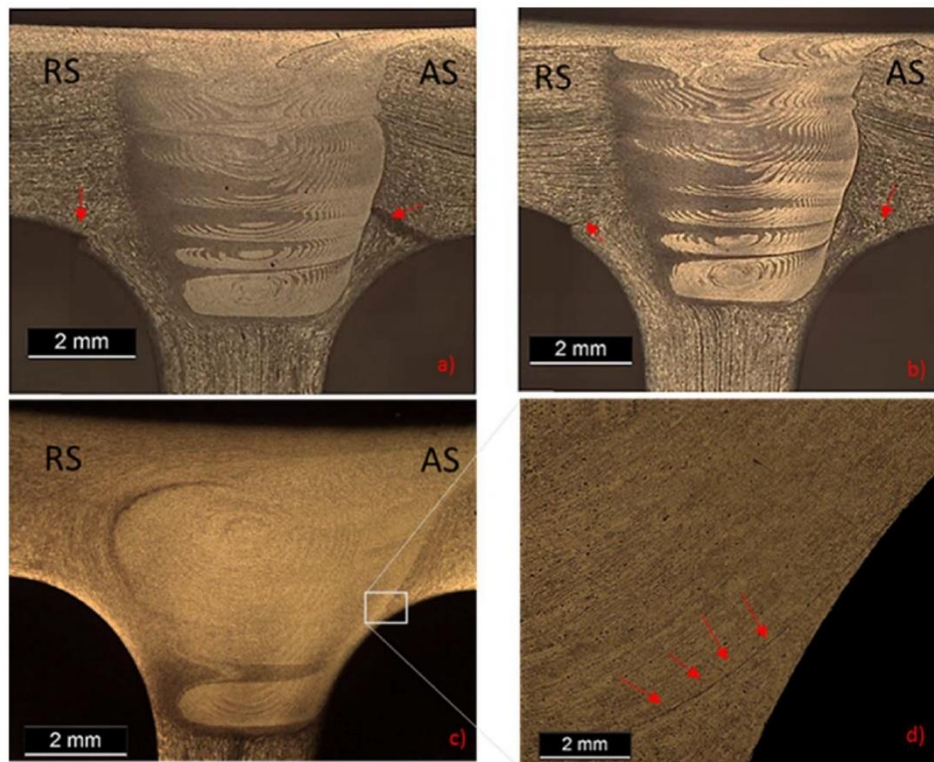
Morphology of the 6082-T6 T-lap welds: a) LTT6-1; b) LTT6-2; c) LTT6-3; d) magnification of image c). RS-retreating side, AS-advancing side.
